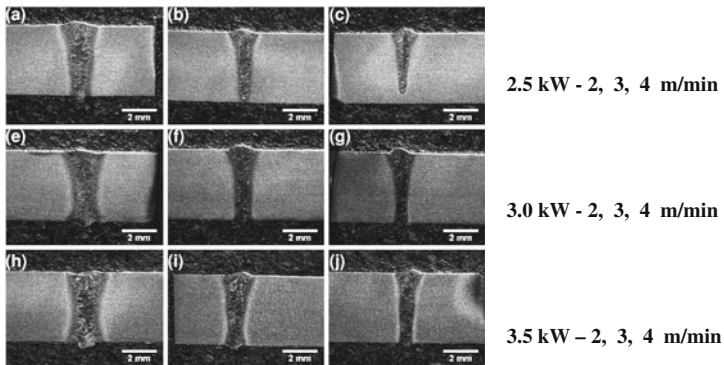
Macrographs of weld bead-on-plate cross sections made at different laser powers and welding speeds [29]
